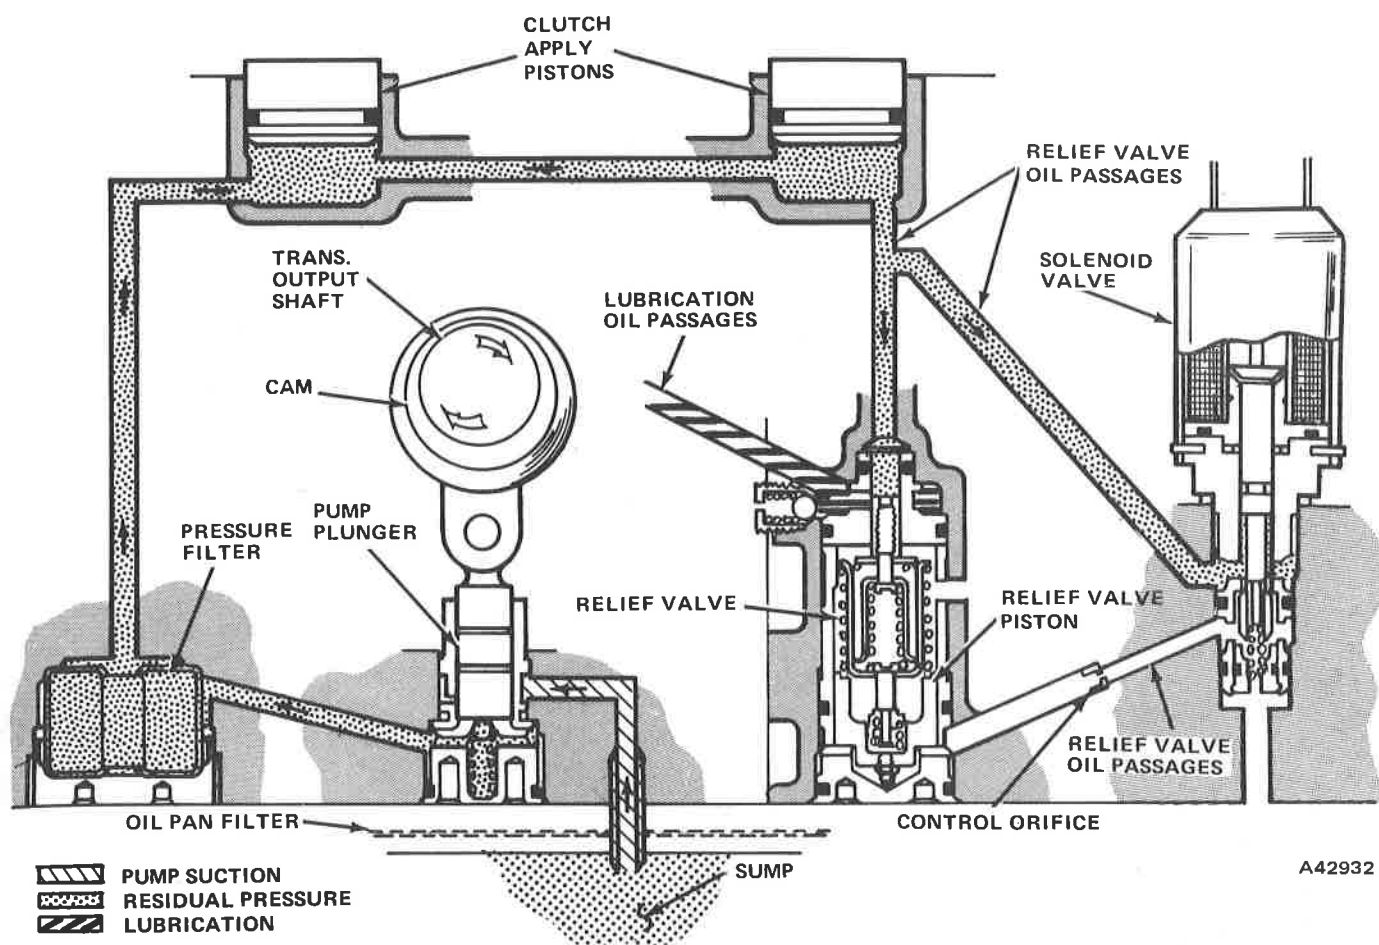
Hydraulic System—Overdrive Disengaged
